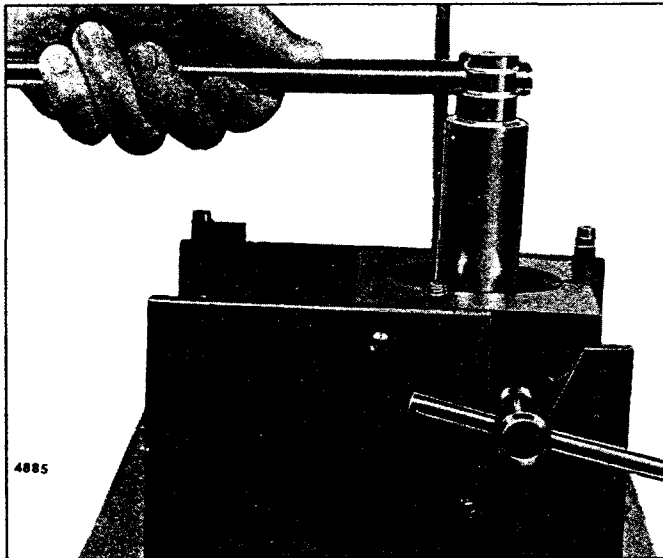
Removing Injector Nut Using Tool J 4983-01
